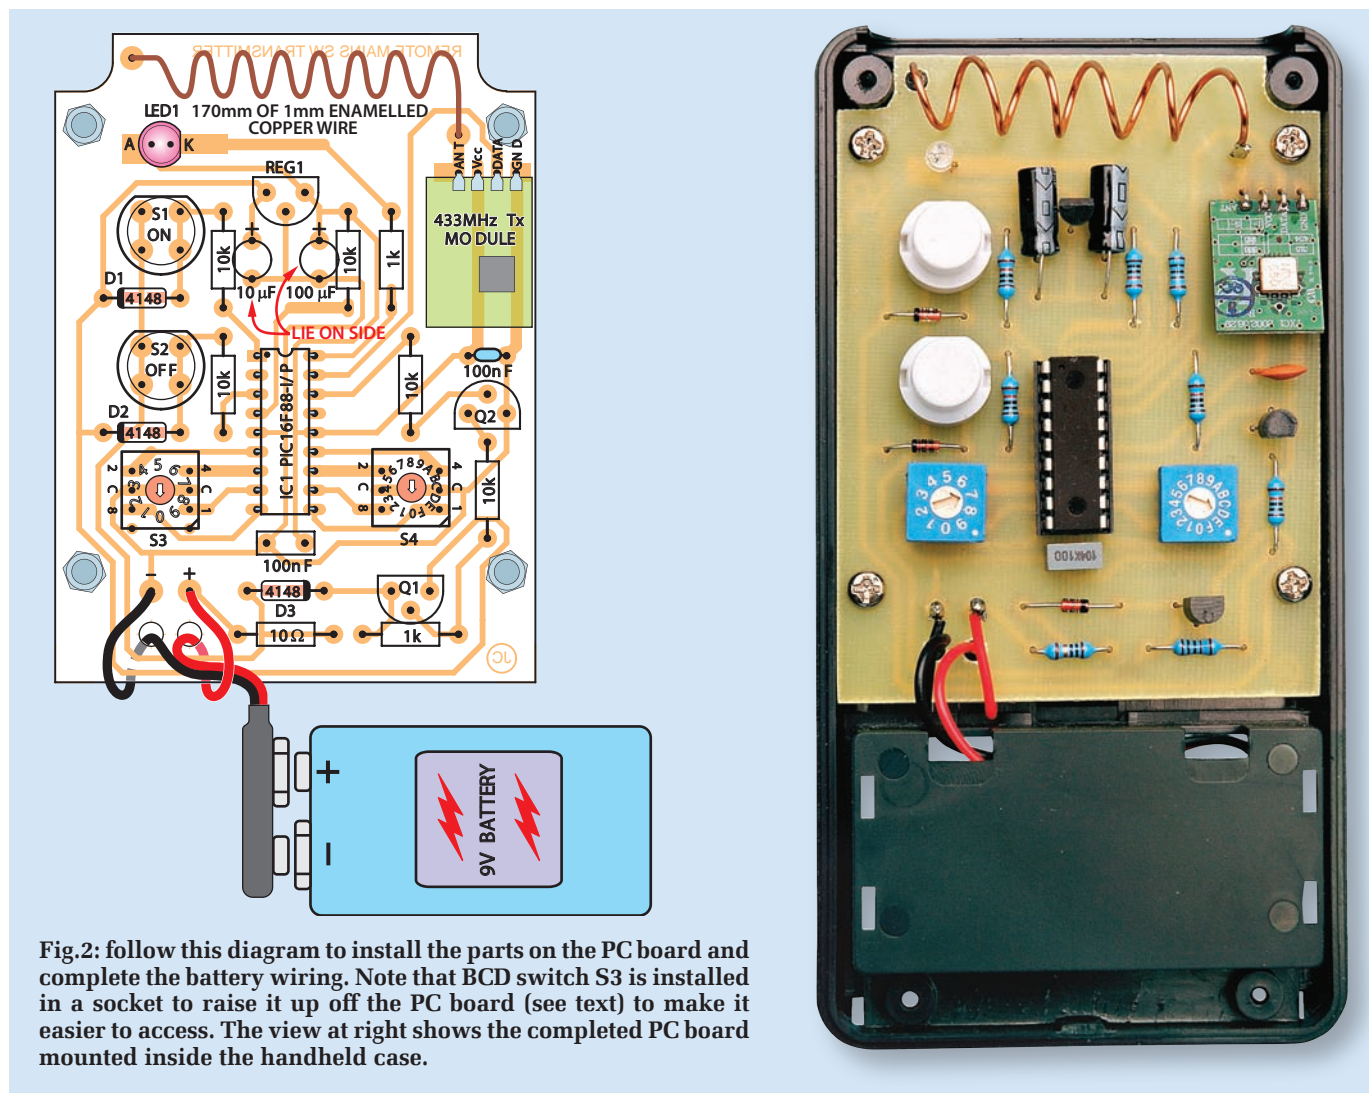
follow this diagram to install the parts on the PC board and complete the battery wiring. Note that BCD switch S3 is installed in a socket to raise it up off the PC board (see text) to make it easier to access. The view at right shows the completed PC board mounted inside the handheld case.
